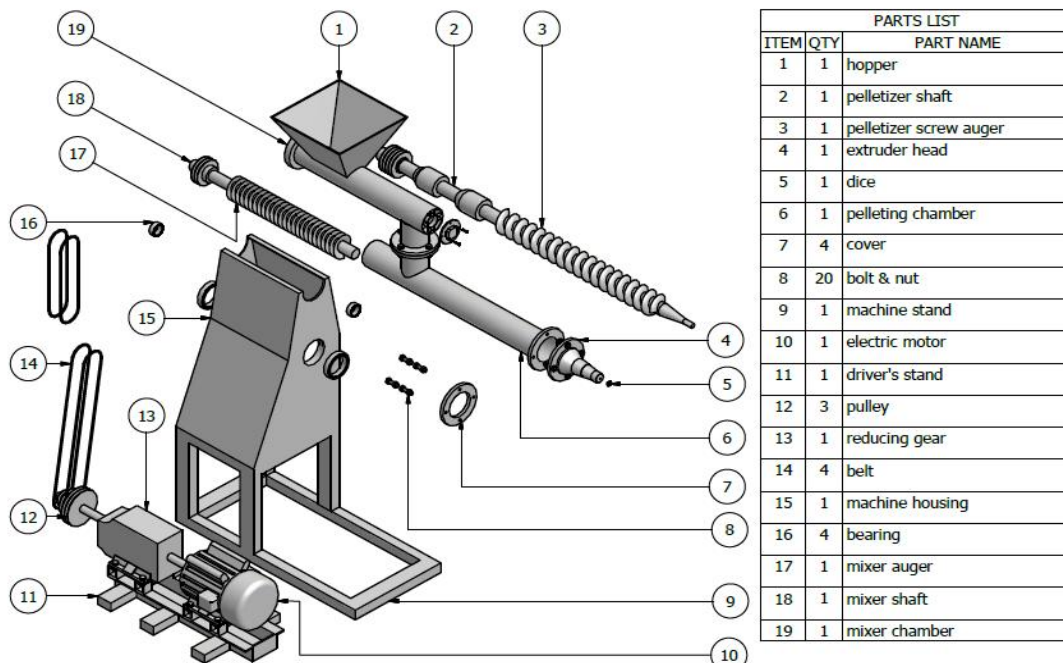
Isometric Drawing of the poultry feed Mixing and Pelleting Machine
